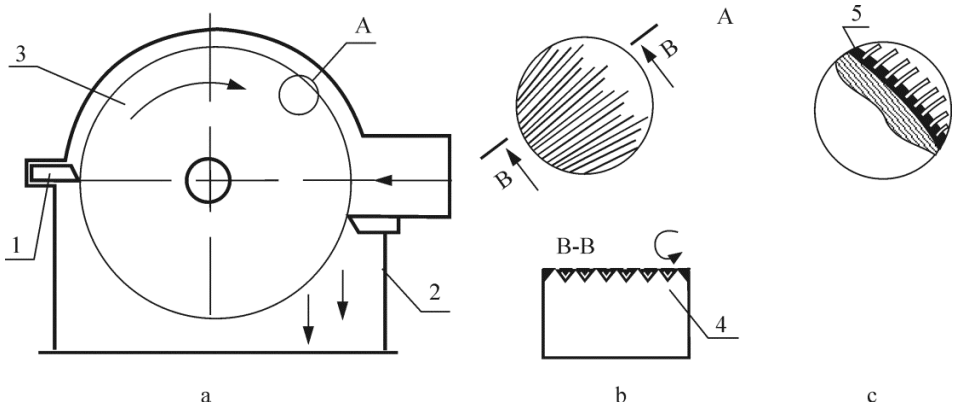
Device for polymer waste treatment: a – disintegrator; b – plate rotor; c – needle rotor; 1 – stator knives; 2 – body; 3 – rotor; 4 – plate; 5 – needles [own study]
